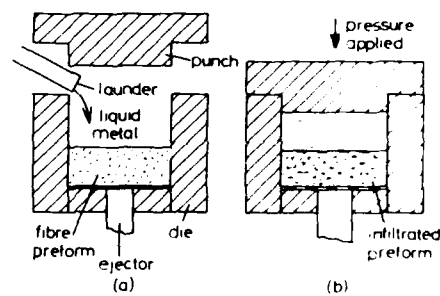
Squeeze casting of composite materials using fibre preforms: (a) before casting, (b) after casting and while applying pressure (after Ref. 4).
